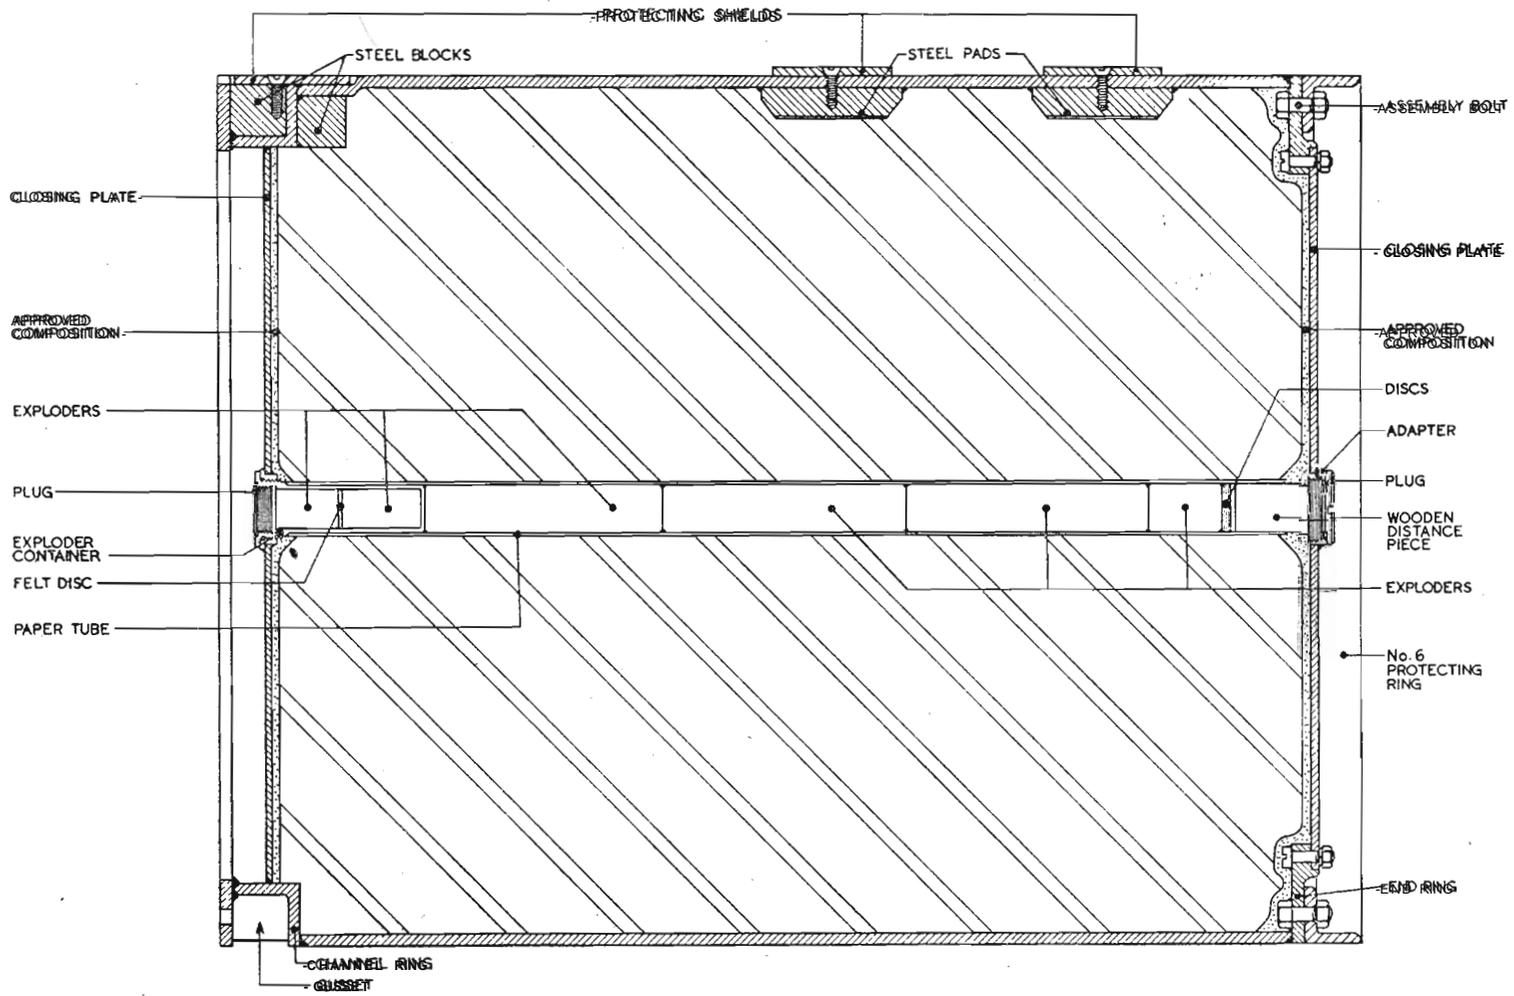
Mk. II bomb body rear section fitted with protecting ring
